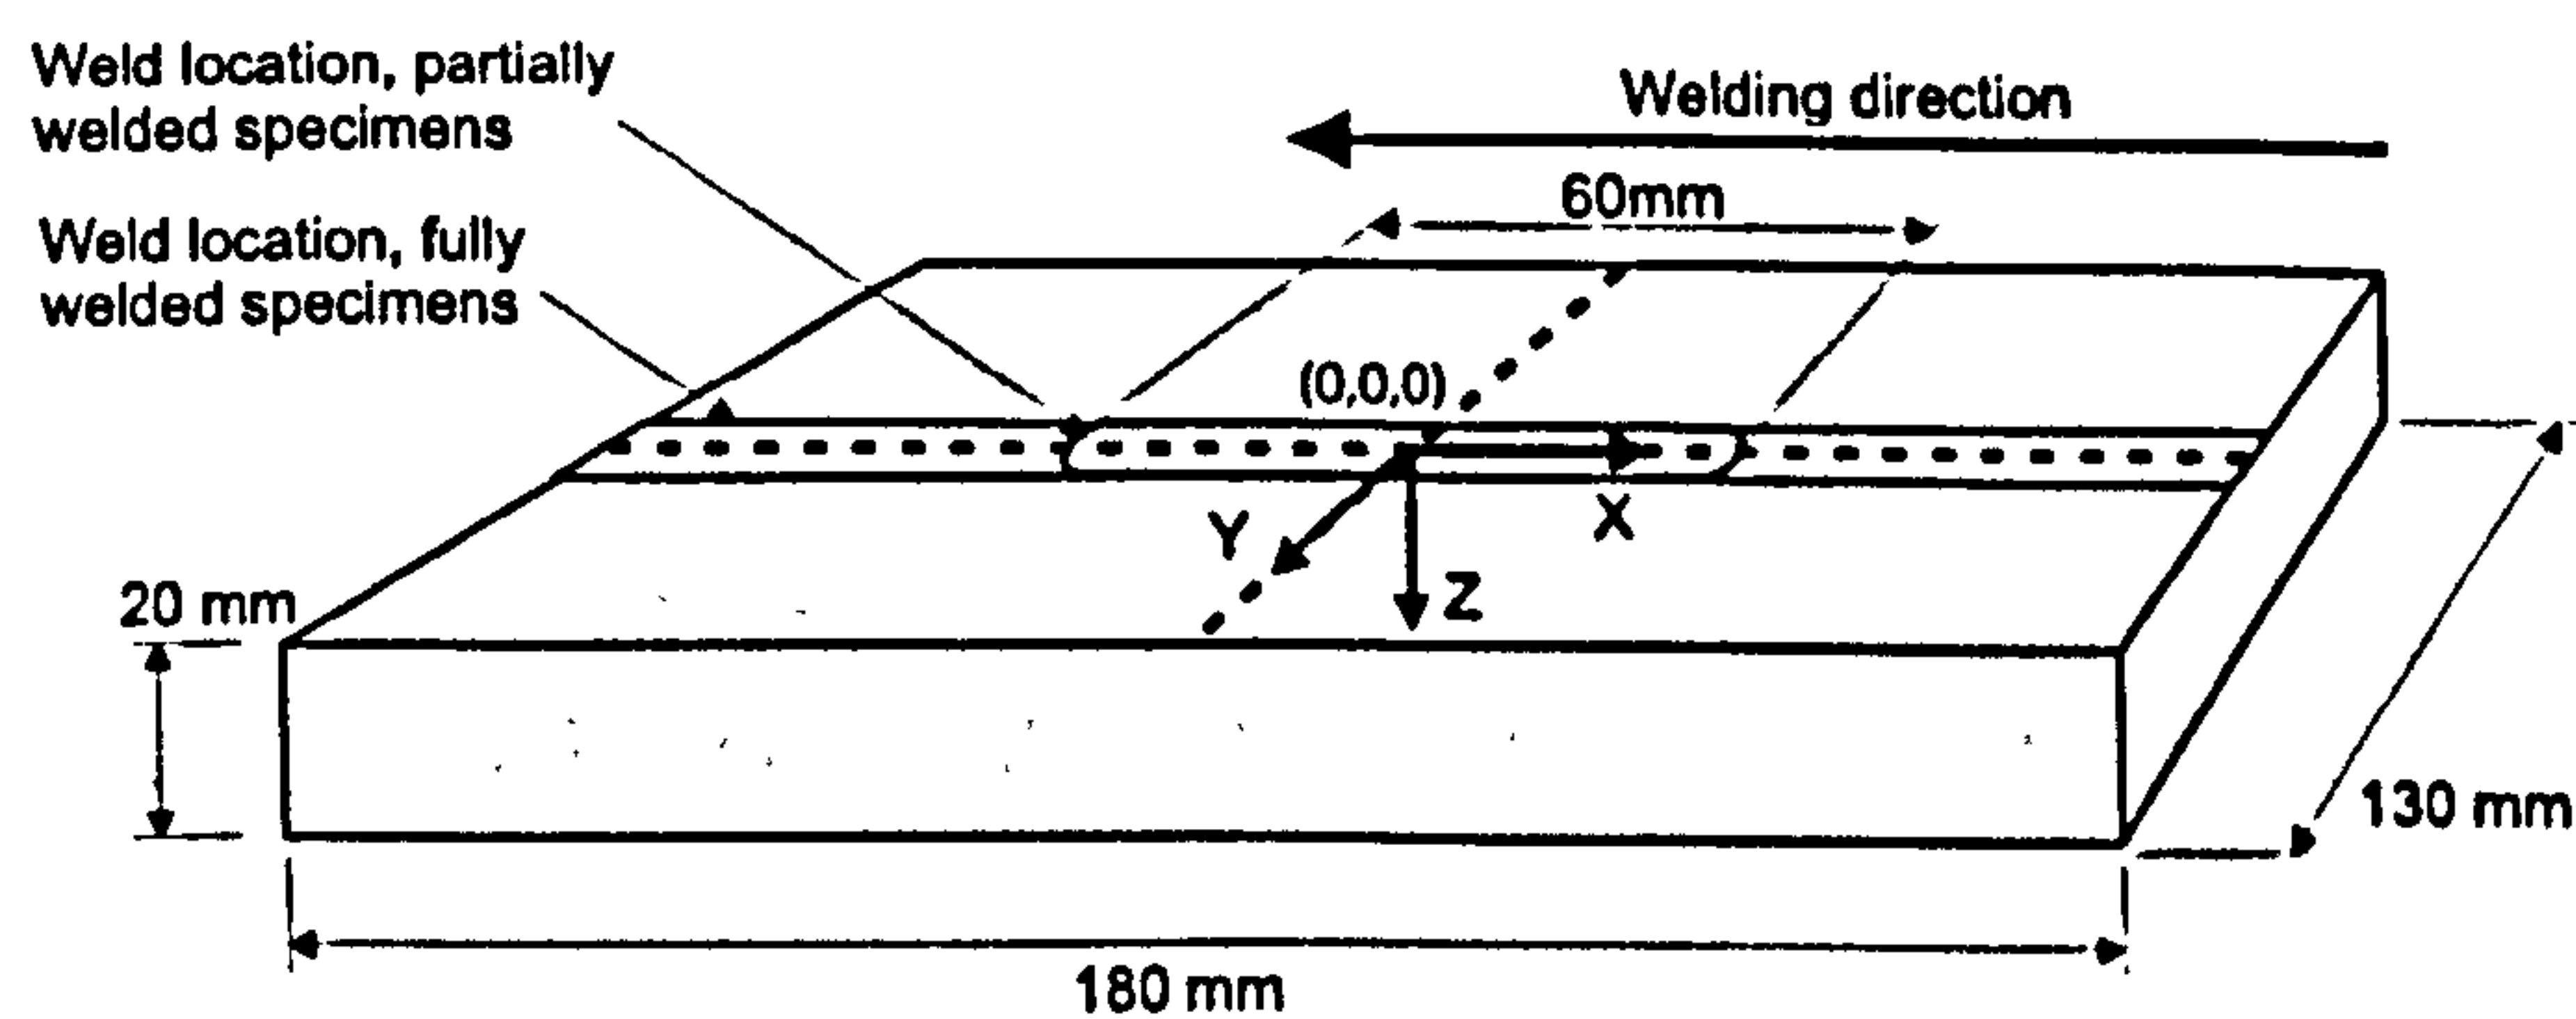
Autogenously welded 316L plates, dimensions and weld location.
